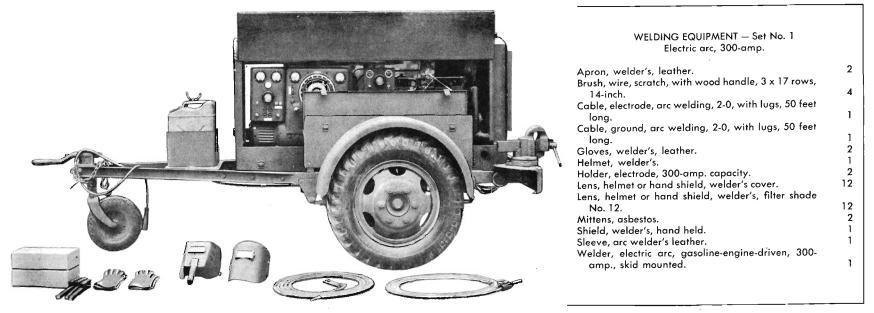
Electric arc-welding equipment, set No. 1, 300-ampere, trailer-mounted.
